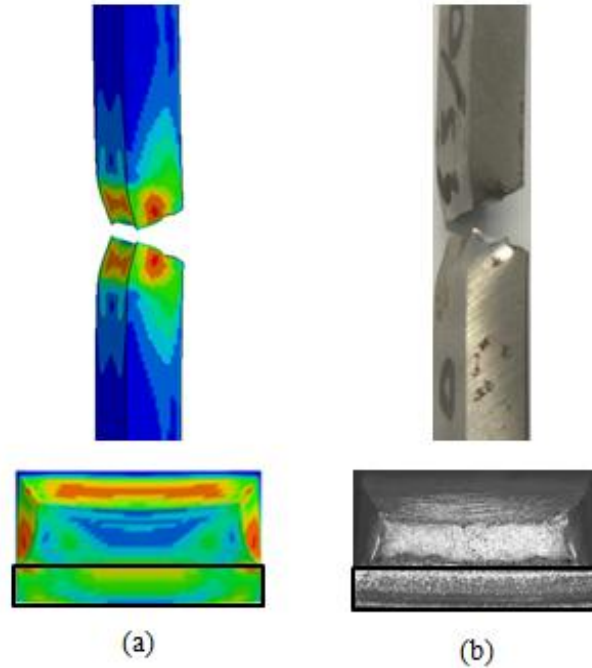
The fractured SENT specimen: Simulated specimen (a); tested specimen (b).
